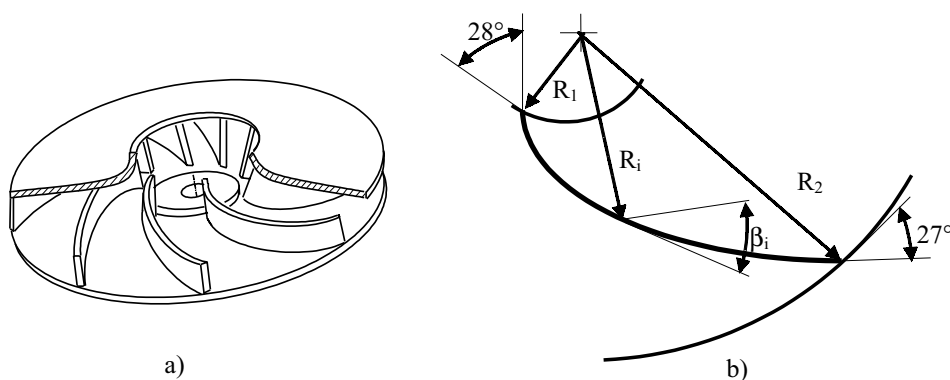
Geometry of the centrifugal impeller; a) impeller 3D cross section and b) impeller blade angles
